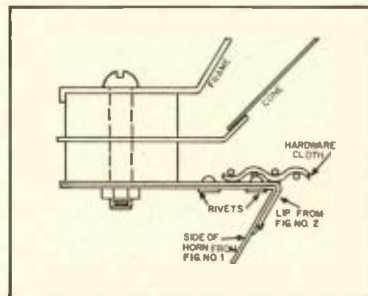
Detail of the mounting of the speaker on the flange and horn.
